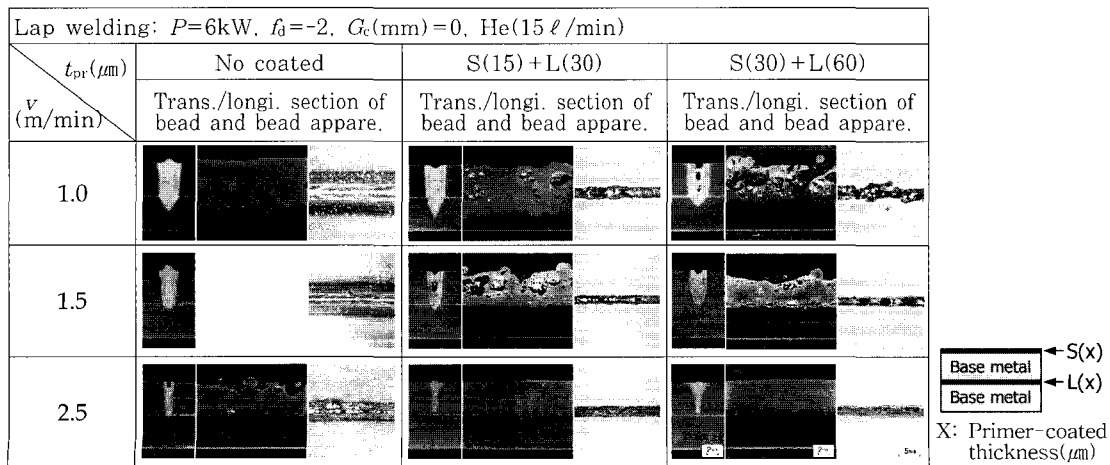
Variation of bead shape by weld speed and primer coated thickness
